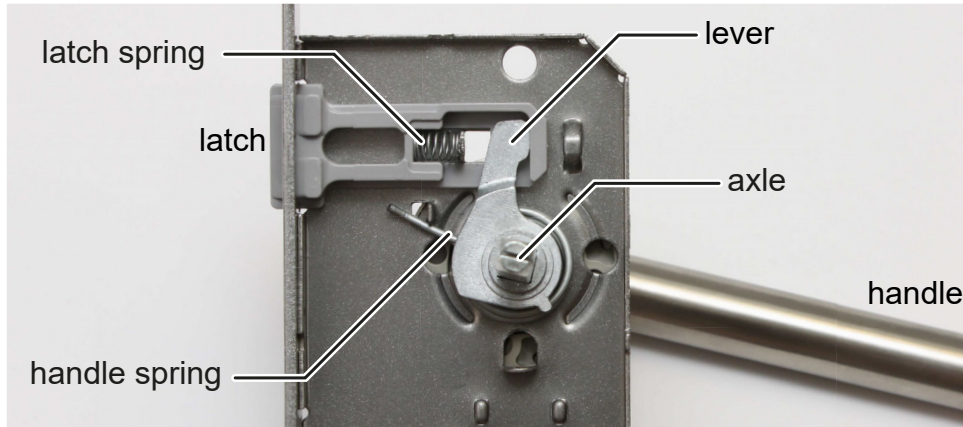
This traditional door latch design consists of many parts, thus requires assembly.
